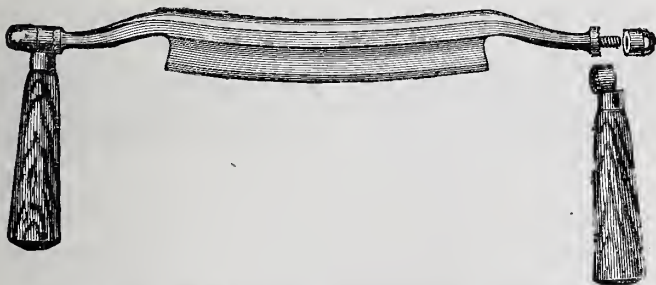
DRAW-KNIFE WITH ADJUSTABLE HANDLES.
